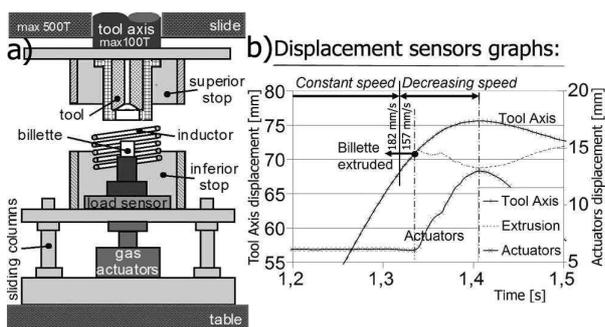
a) Extrusion test device mounted in the press; b) extrusion tests at constant speed
